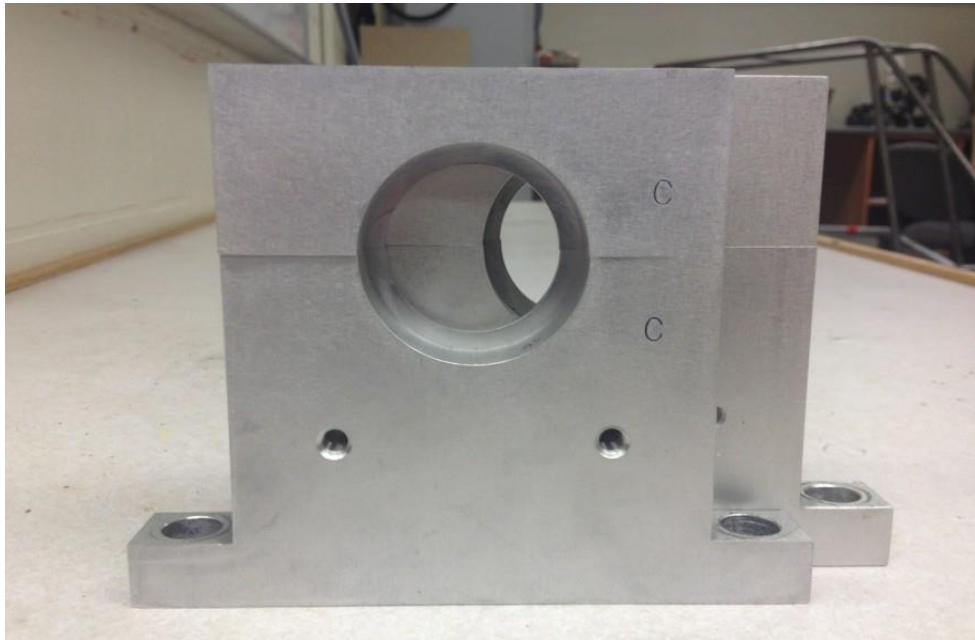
Cocked Bearing Housing Used For Rotor Unbalance
